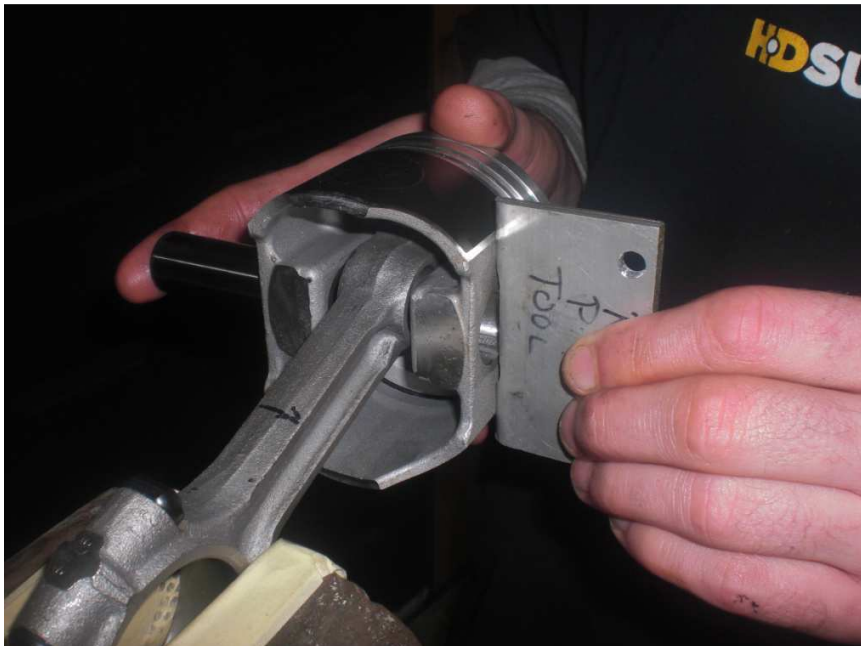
Inserting Rod pin using tool – quickly and smoothly
